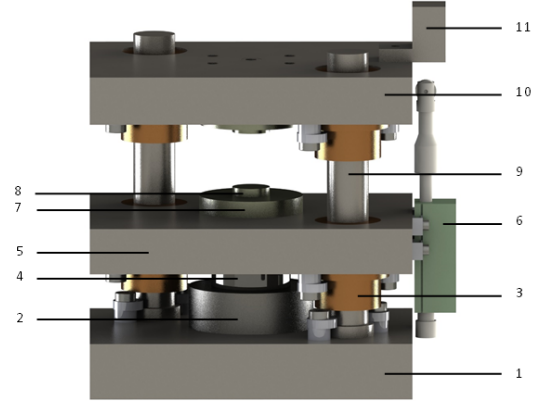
Uniaxial compression tool CAD: 1 - Tool base; 2 - Load cell base; 3 - Bushing; 4 - Load cell; 5 - Bottom platen; 6 - Displacement sensor; 7 - Steel platen; 8 - Compression platen; 9 - Guide; 10 - Top platen; 11 - Actuator.
